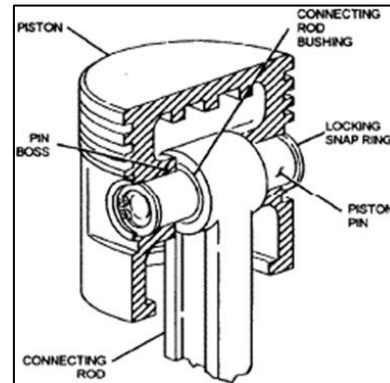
Assembly View of the Gudgeon/piston pin of the piston with small end of the connecting rod.
